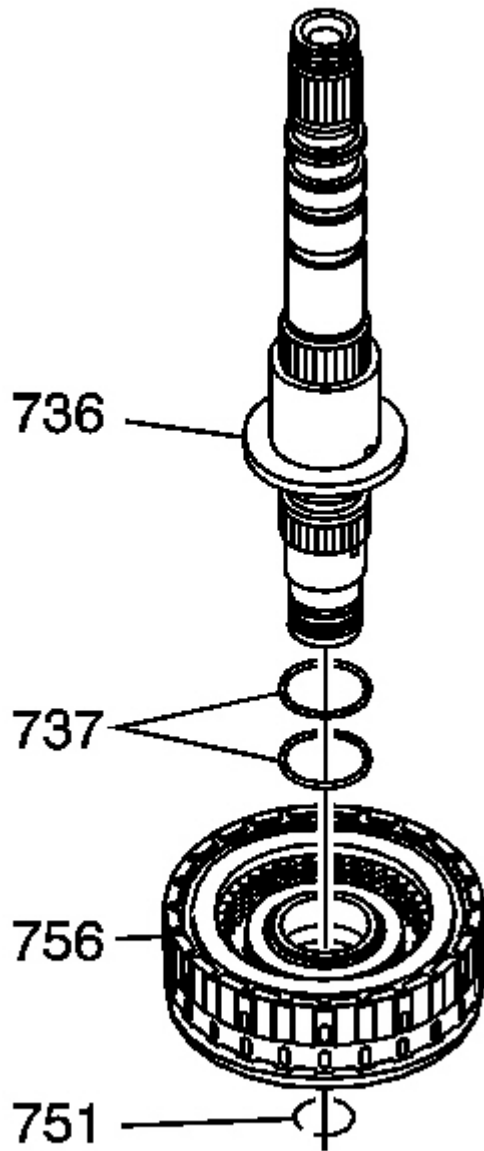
Installing 2nd Clutch Assembly & 32 mm 2nd Clutch Housing Retaining Ring
